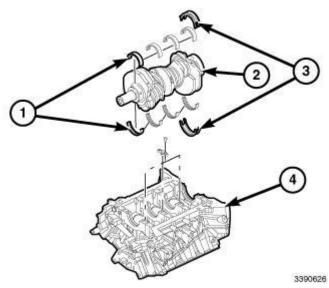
Crankshaft, Bearings, Thrust Bearing & Engine Block Courtesy of CHRYSLER GROUP, LLC
